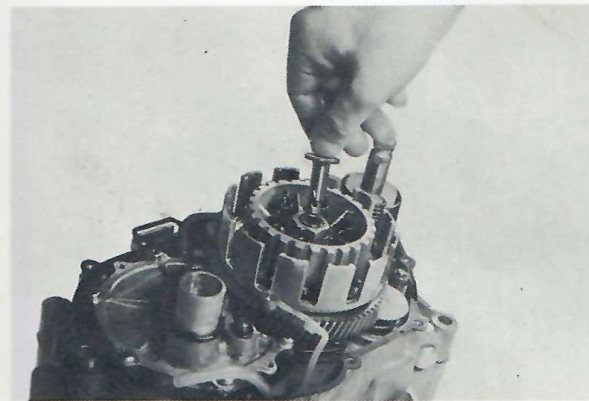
Removing clutch release rod and clutch pressure plates
